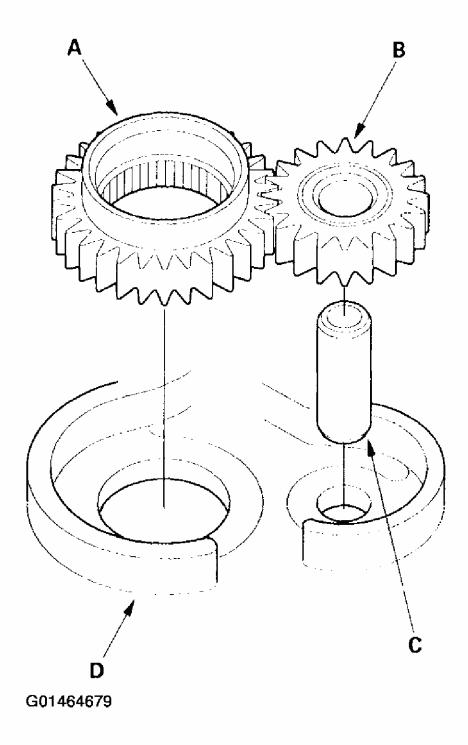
Installing The ATF Pump Drive Gear, Driven Gear & ATF Pump Driven Gear Shaft In The Main Valve Body
